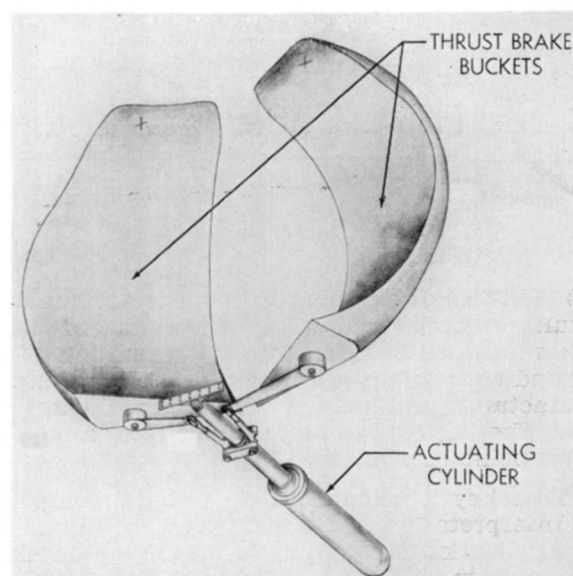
Thrust brake actuating system (thrust brake partially extended)
